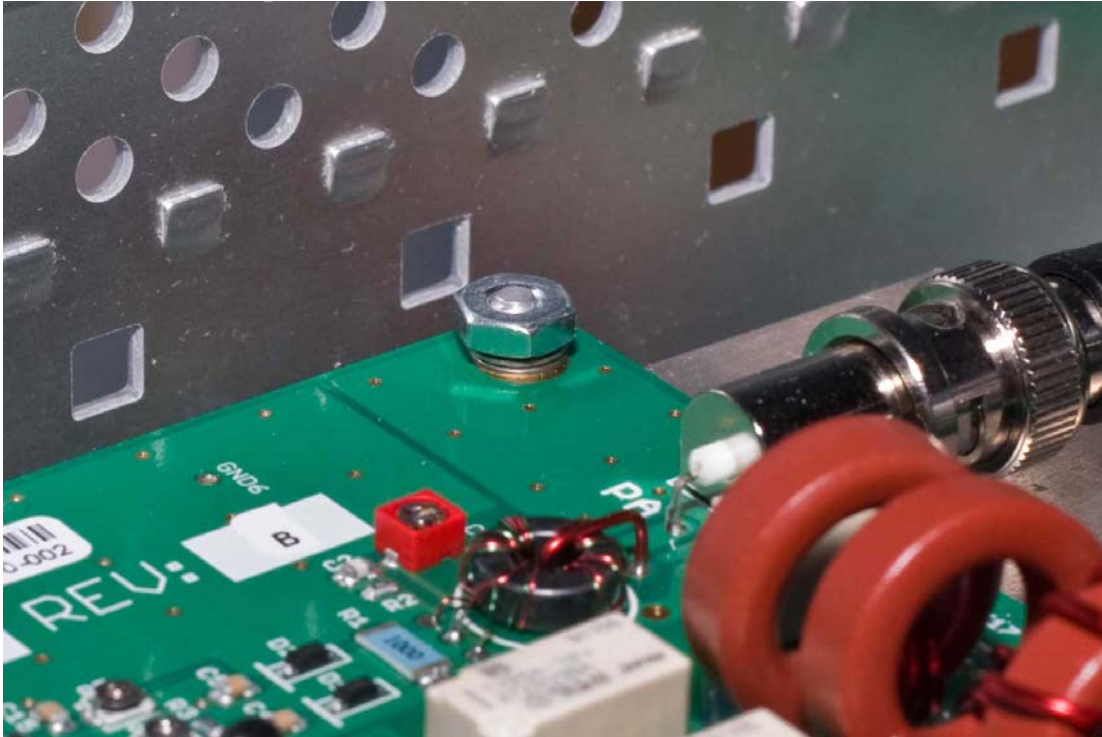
Installation of four 1/4" spacers on top of shield
